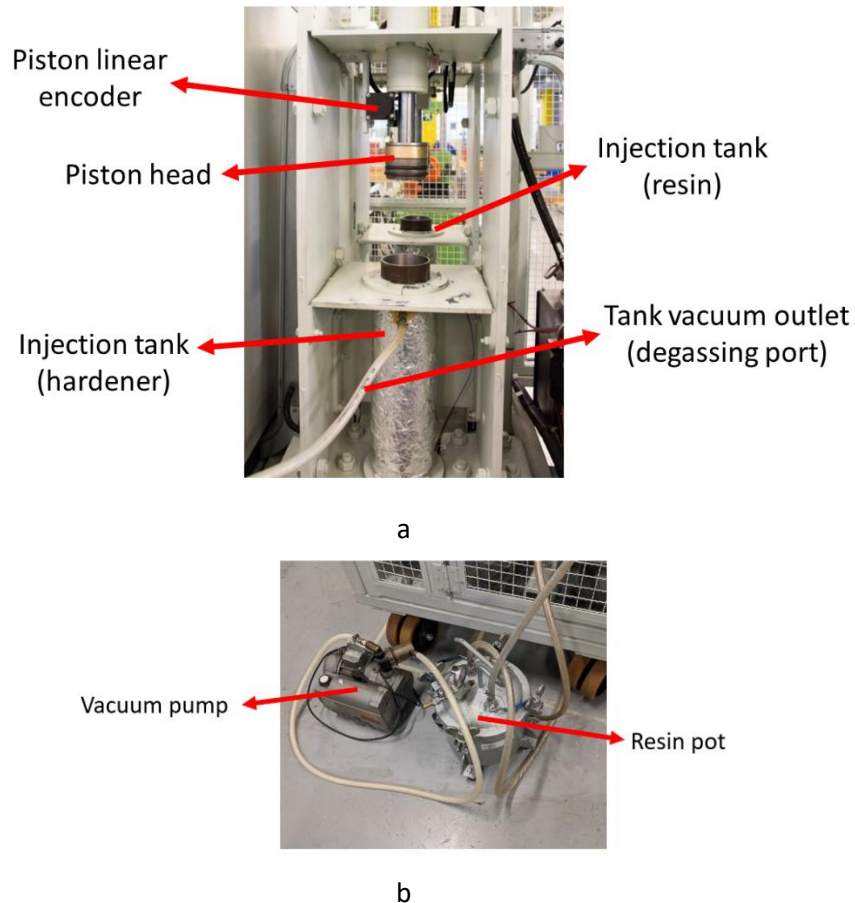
Detail of machine loading tanks and injection pistons. (a) Vacuum ports are located in the tanks side and connected to the vacuum pump and a resin trap by silicone hoses (b).
